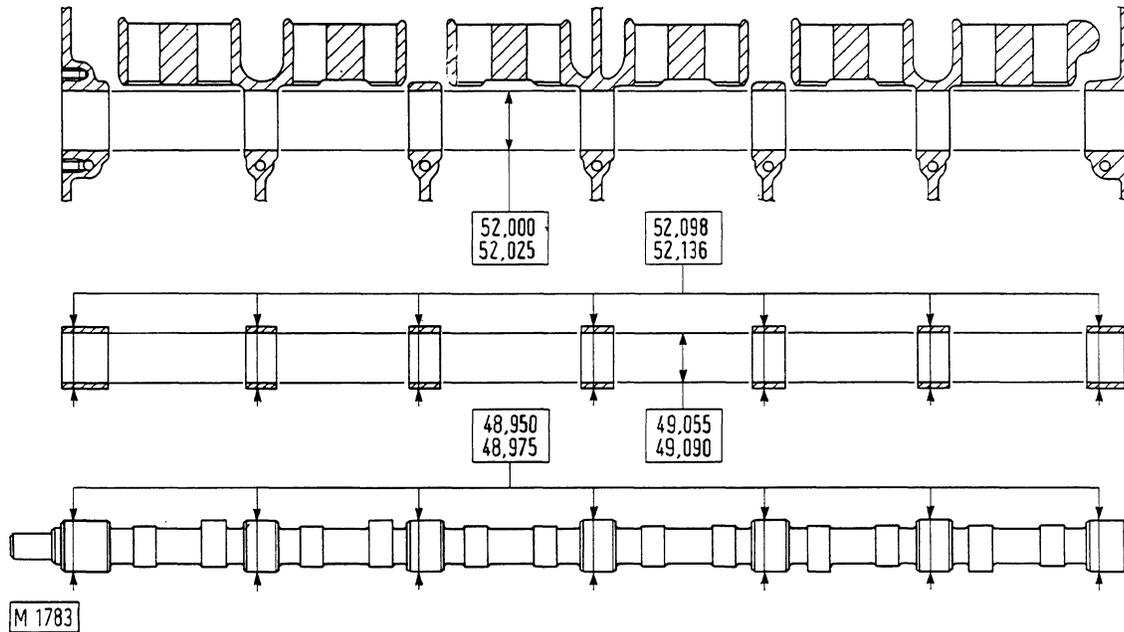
Dimensions of camshaft journals, bushings and relevant seats.
